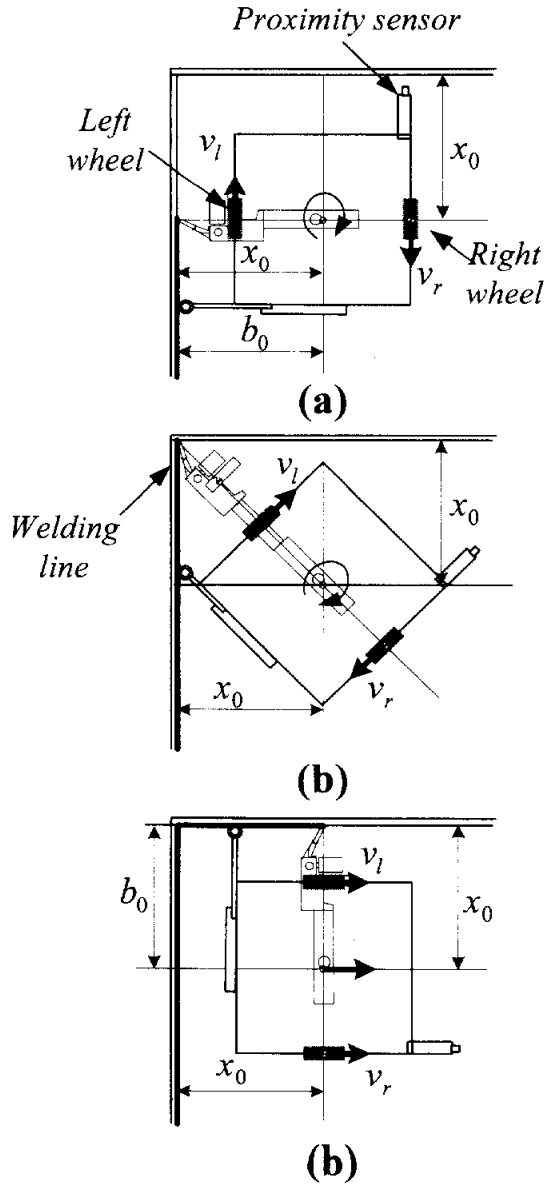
Turing motion of a mobile robot for lattice welding
